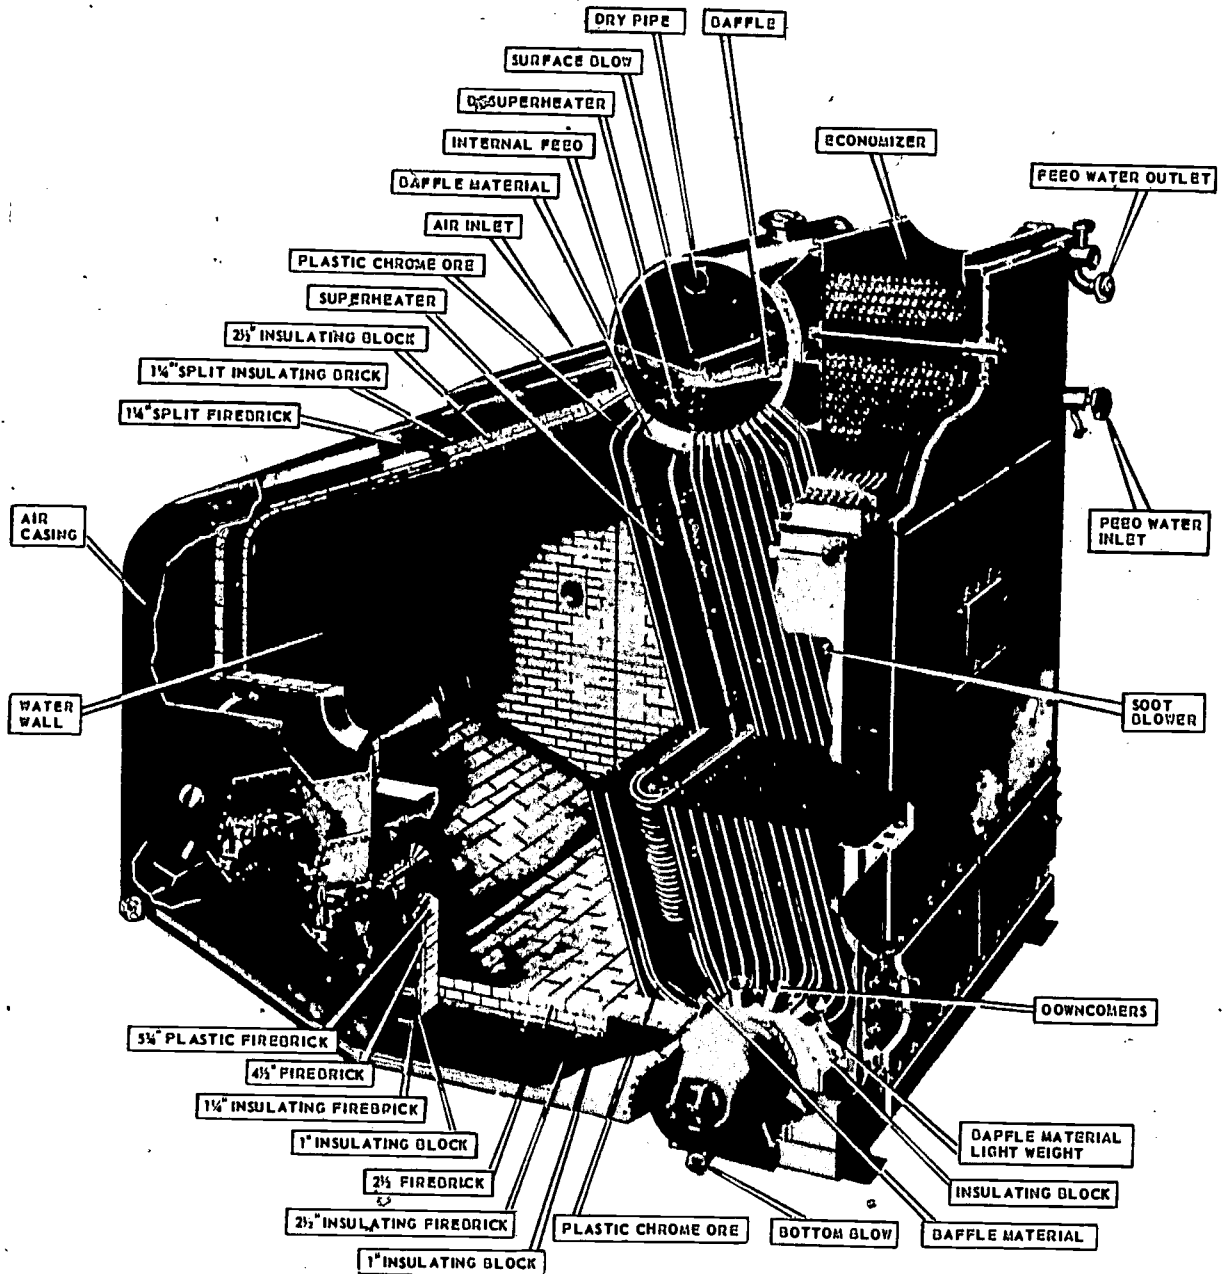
Cutaway view of a D-type boiler (older type).
